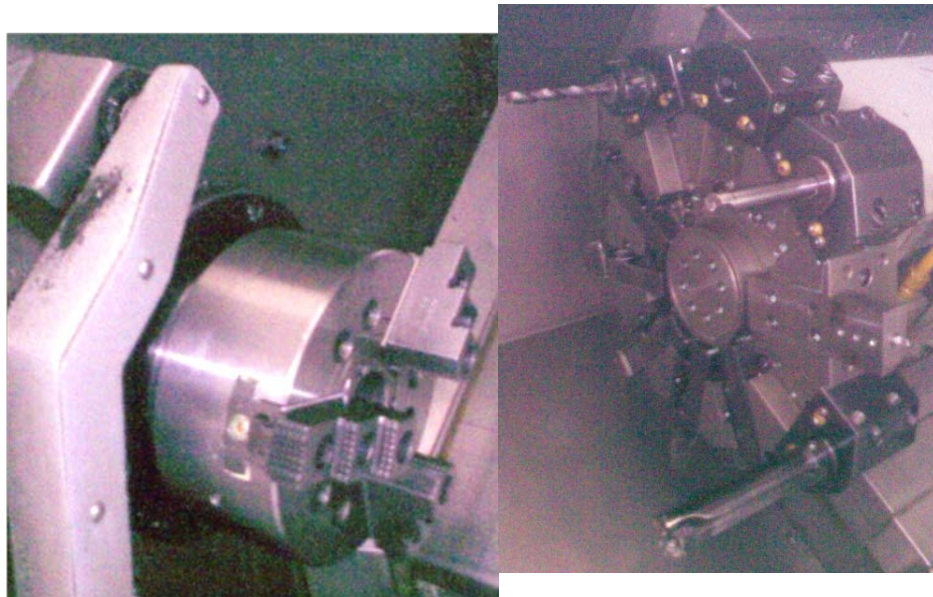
y 2.21 Respectively chuck and carousel tool carriers.
